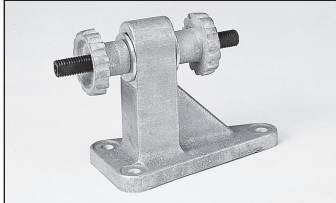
Mandrel Rod Stop Assembly 412/424
